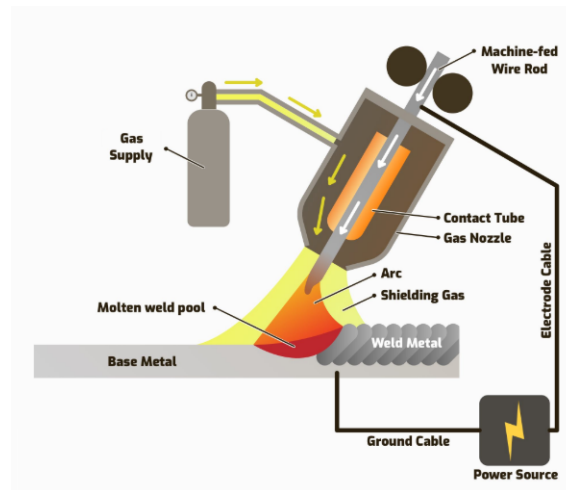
Schematic of the MIG/MAG welding process. Adapted from [5].
